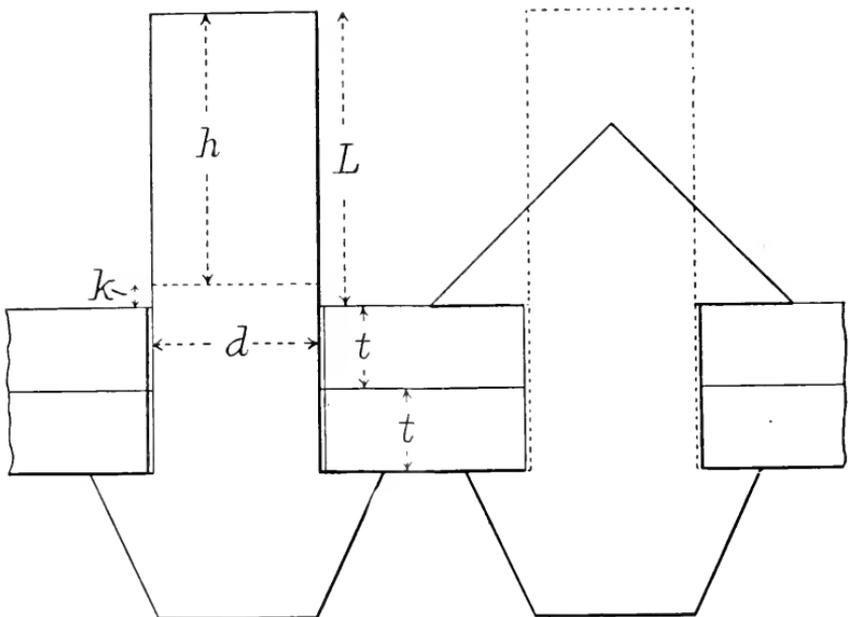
ILLUSTRATING THE PROJECTION OF THE RIVET THROUGH THE PLATES BEFORE DRIVING.
